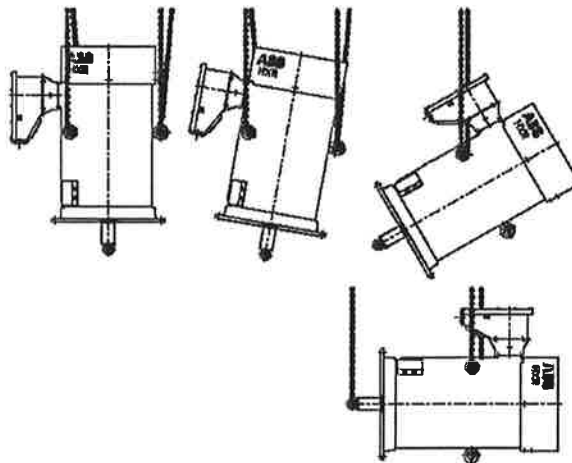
Machine with turnable lifting eyes: lifting and turning
